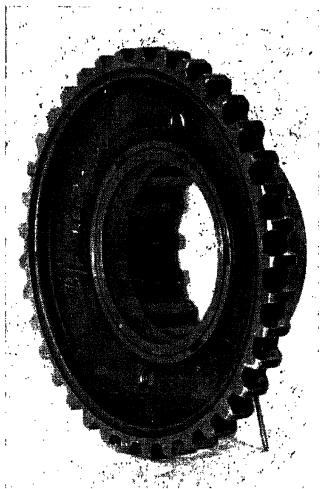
Bramo Fafnir 323P crankshaft coupling gear.
